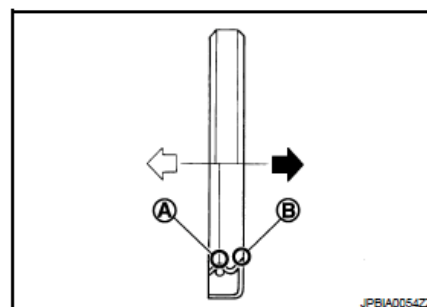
Identifying Oil Seal Lip And Dust Seal Lip
